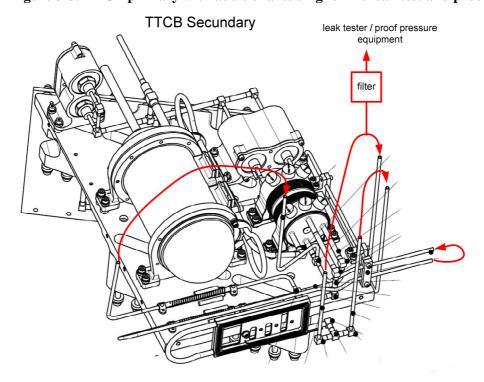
TTCB secondary with additional tubing for He leak test and proof pressure test.
